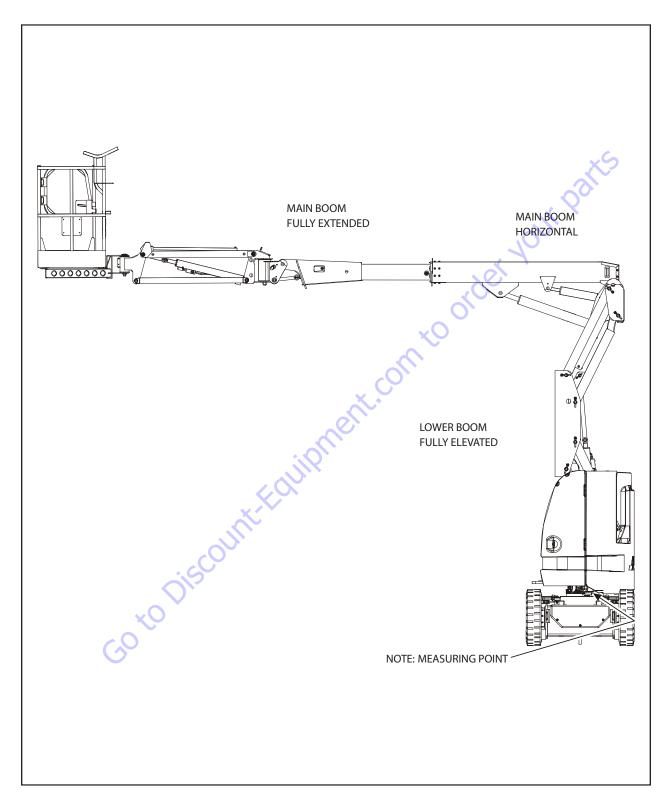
Swing Bearing Tolerance Boom Placement
